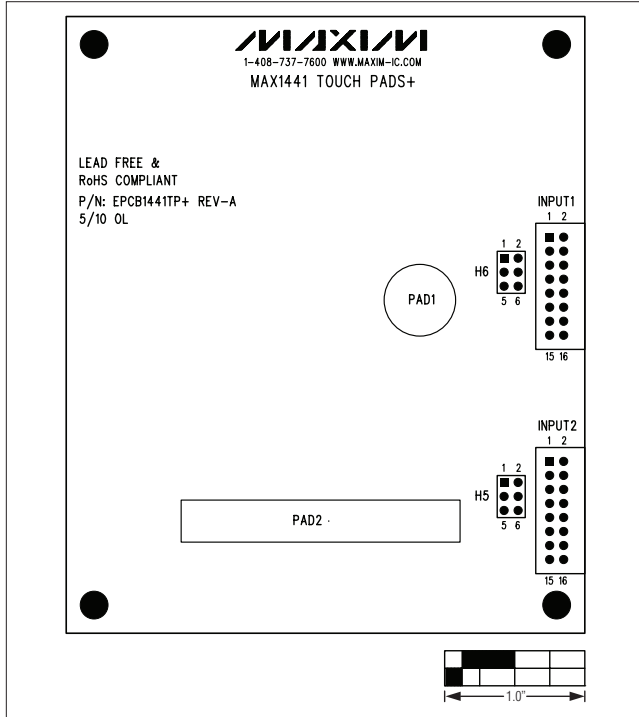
MAX1441TP EV Kit Component Placement Guide—Component Side
